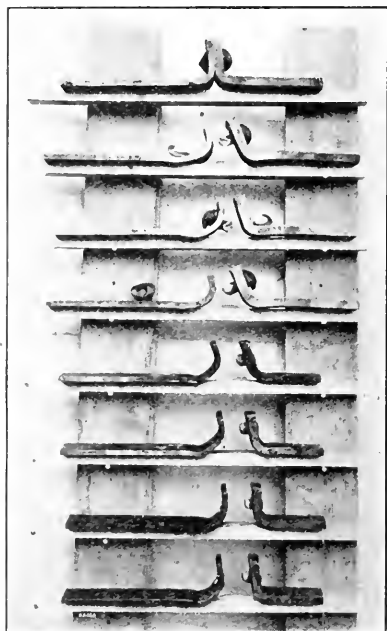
SPECIMENS OF TYPE A, RIVETED
